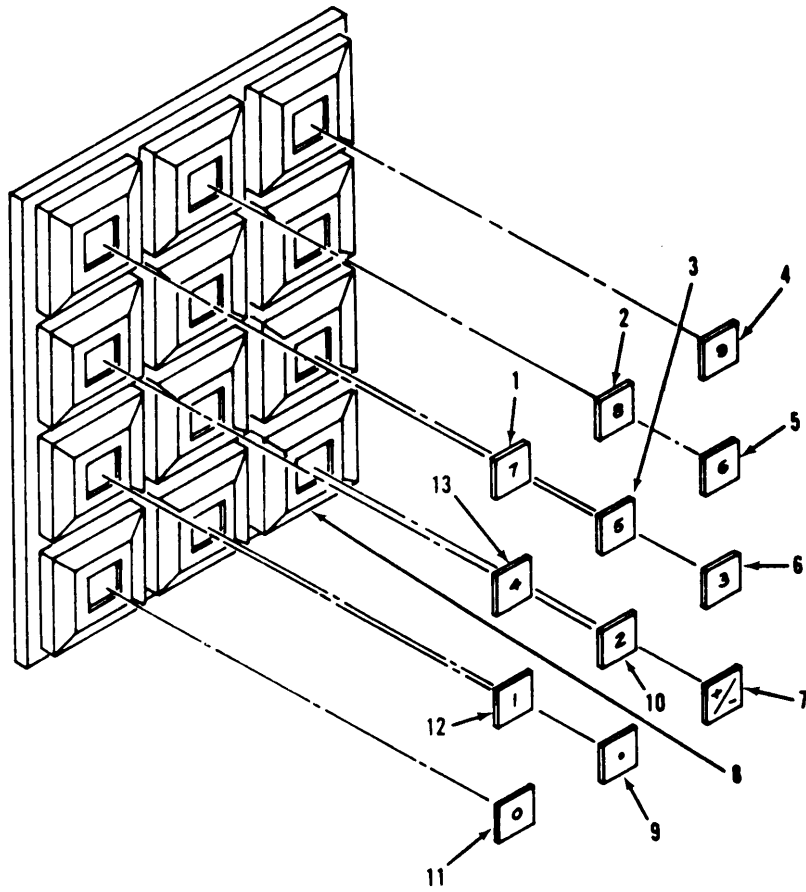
KEYBOARD ASSY COMPONENT PARTS
